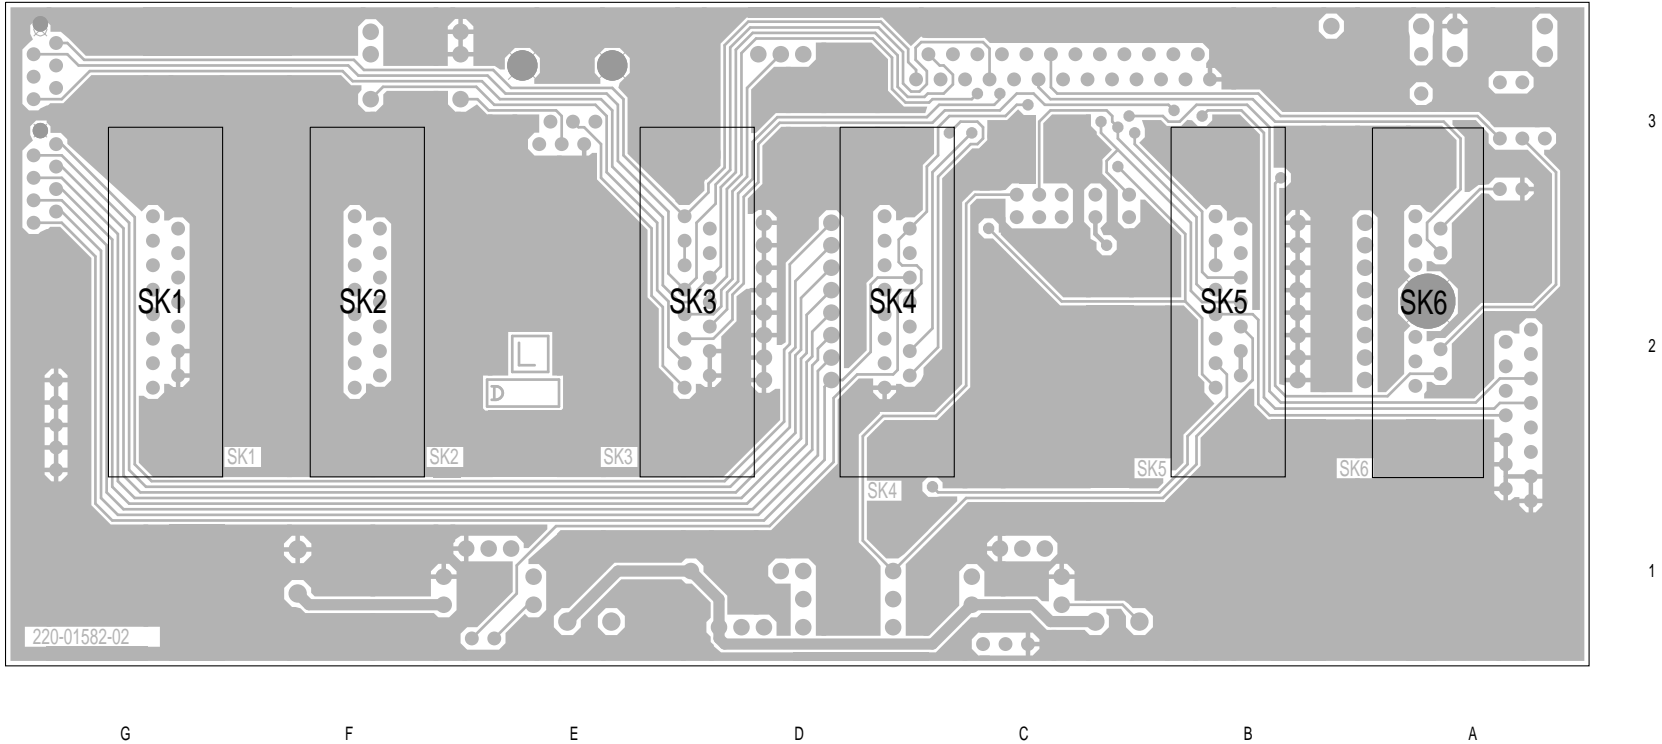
T800-55-0000 PCB Layout - Bottom Side (Inner)
